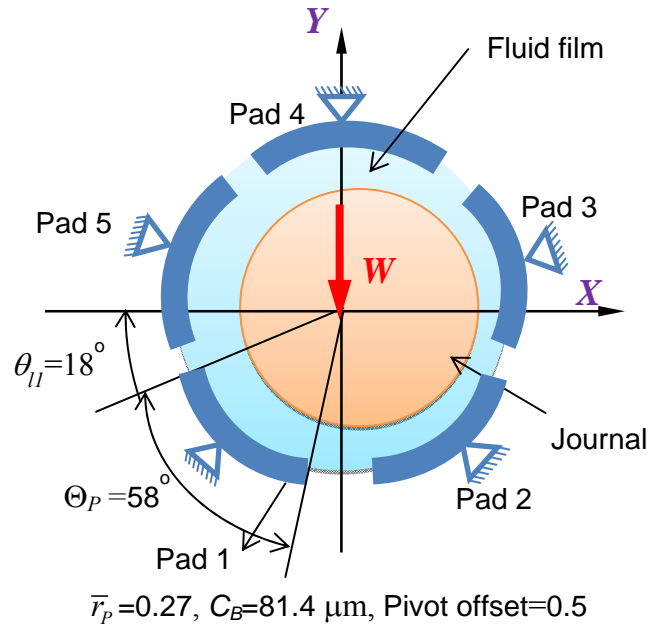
Load configuration and pad arrangements of the test tilting pad journal bearing in Ref. [23].
